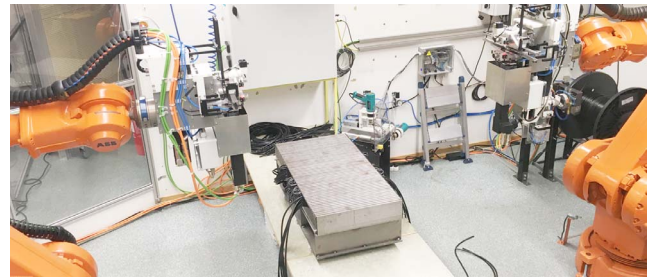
The complete robot cell used during the experiments, with the shortened UU WEC stator section, the constructed robot cable feeder tools mounted on the industrial robots and the constructed drum cable feeder tool mounted with the drum feeding and the cable cutting equipment.
